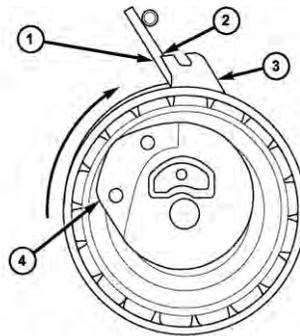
TIMING BELT TENSIONER ALIGNMENT
